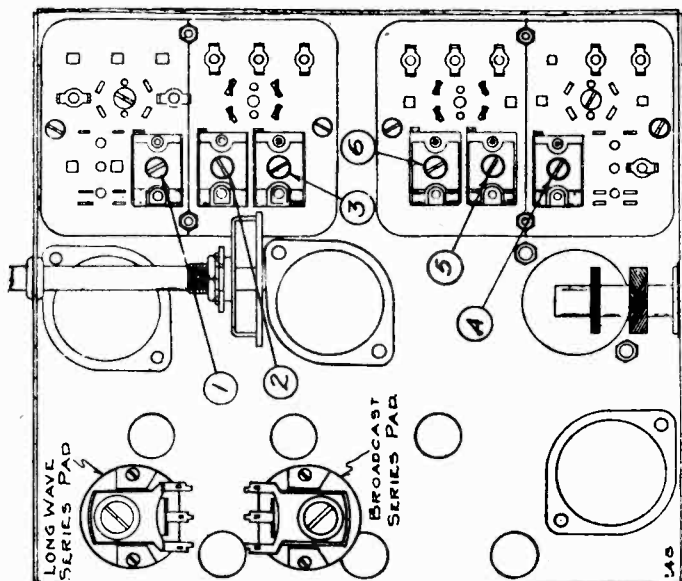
BOTTOM VIEW (Showing Trimmers)
